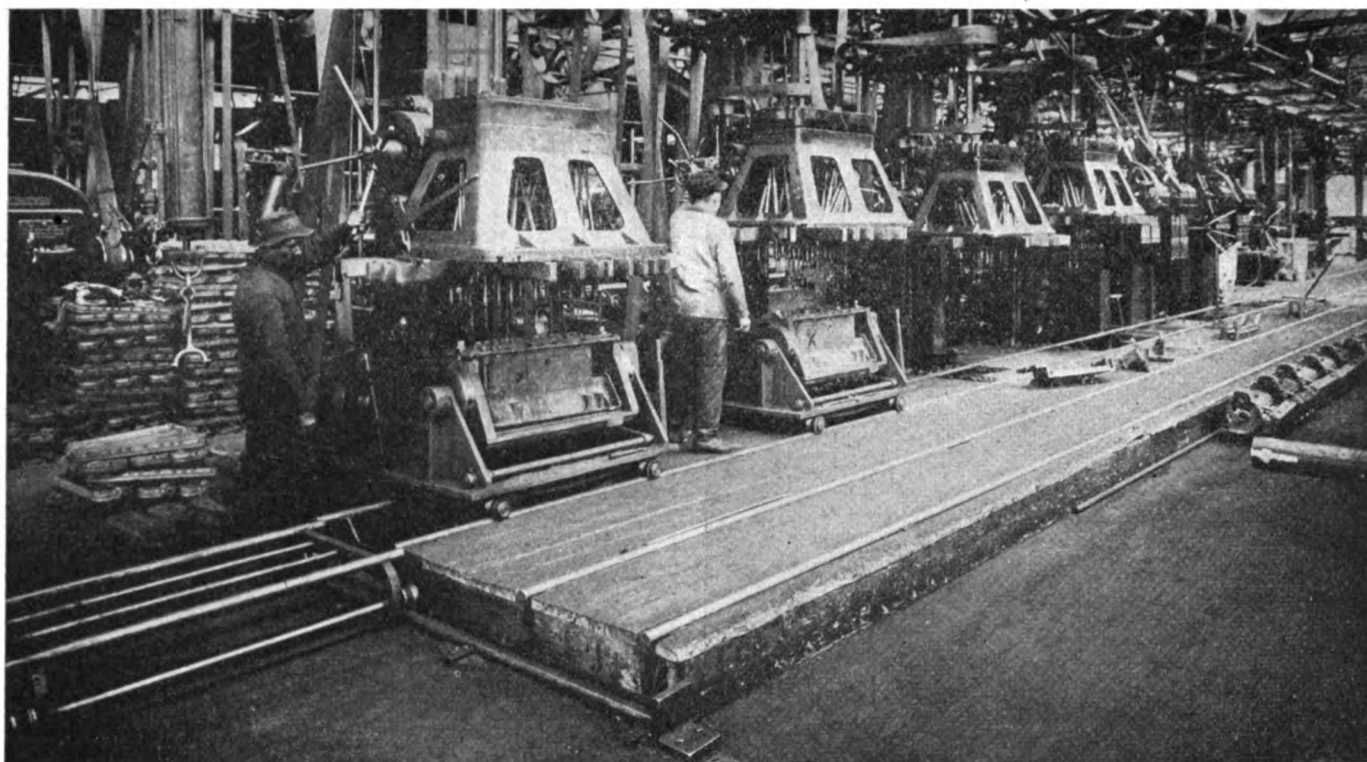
Railroad fixture for drilling and reaming holes in cylinder block for valve stem and push rod guides. This set-up also takes care of valve seats and all holes and machine work related to the valve mechanism
